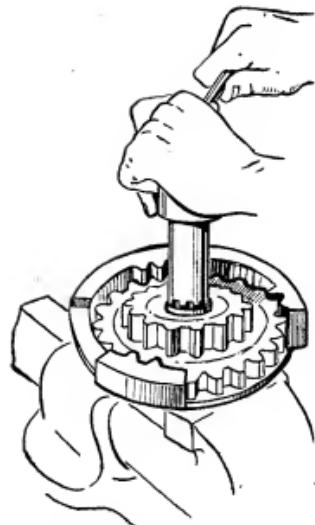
Using a "dogging" tool to tighten a gear-retaining nut
